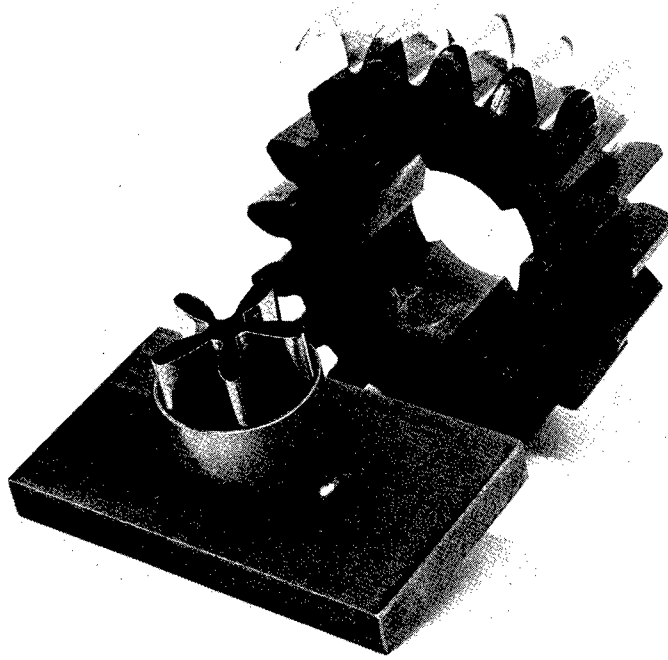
CORRUGATING GEAR AND SIZING FIXTURE FOR FABRICATING DESIGN B FIN MODULES
